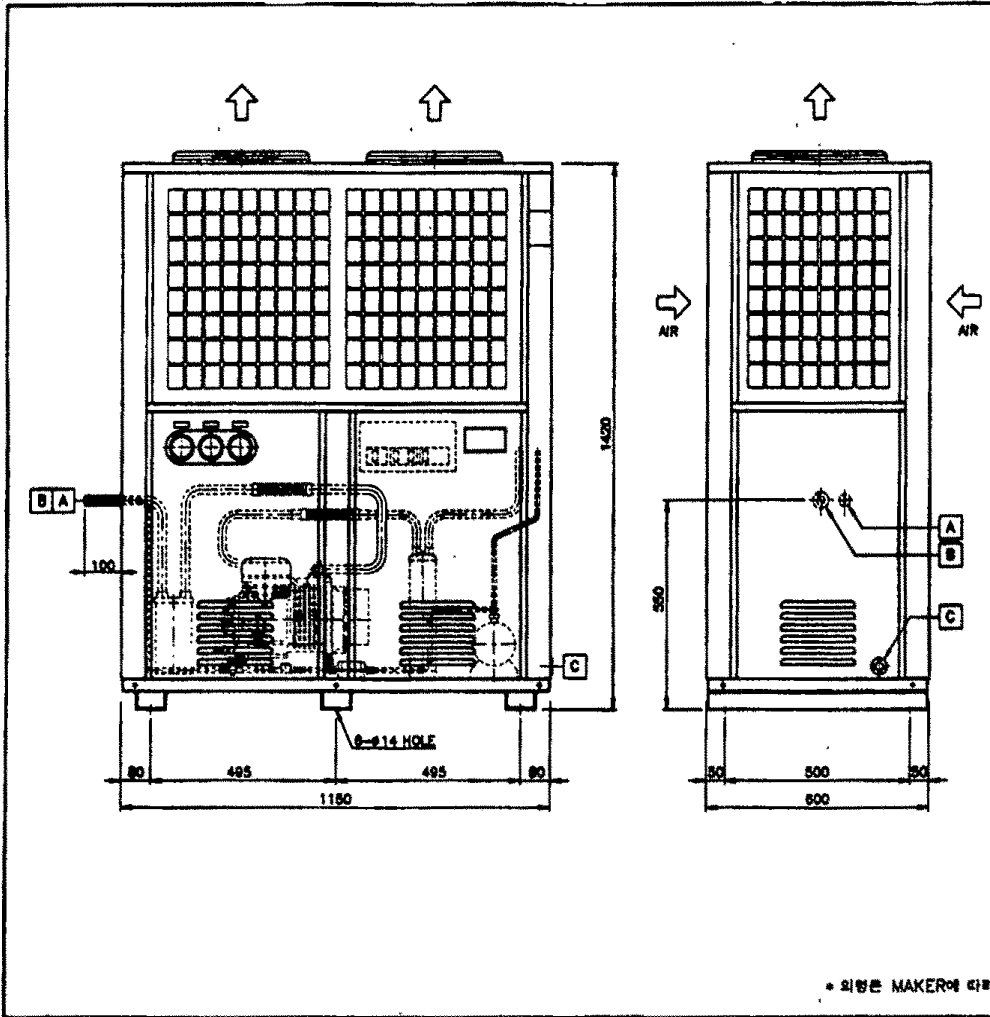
Drawing for manufacture of combined curing system with heat pump type evaporator(evaporator).
